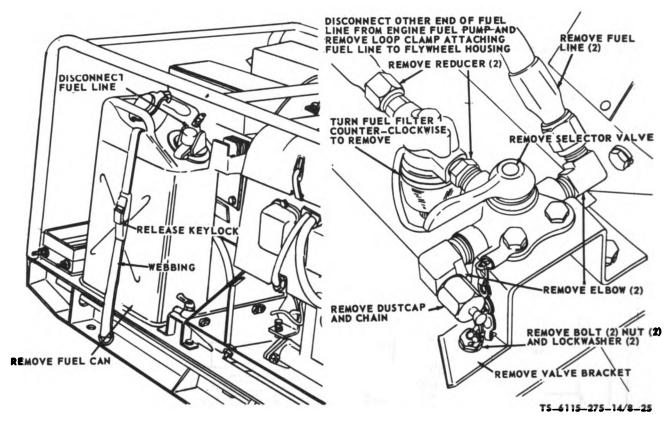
Fuel lines, fuel filter and fuel selector valve, removal and installation (Model MEP-023A).
